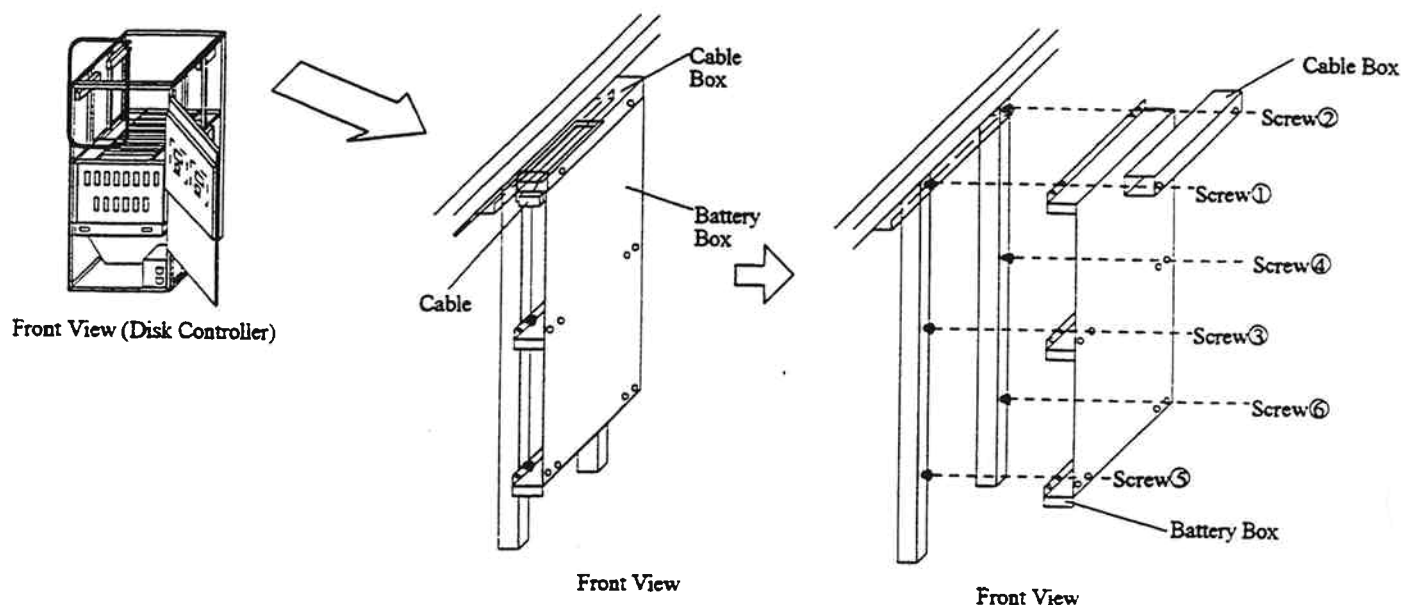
Removal of the Battery Box.
